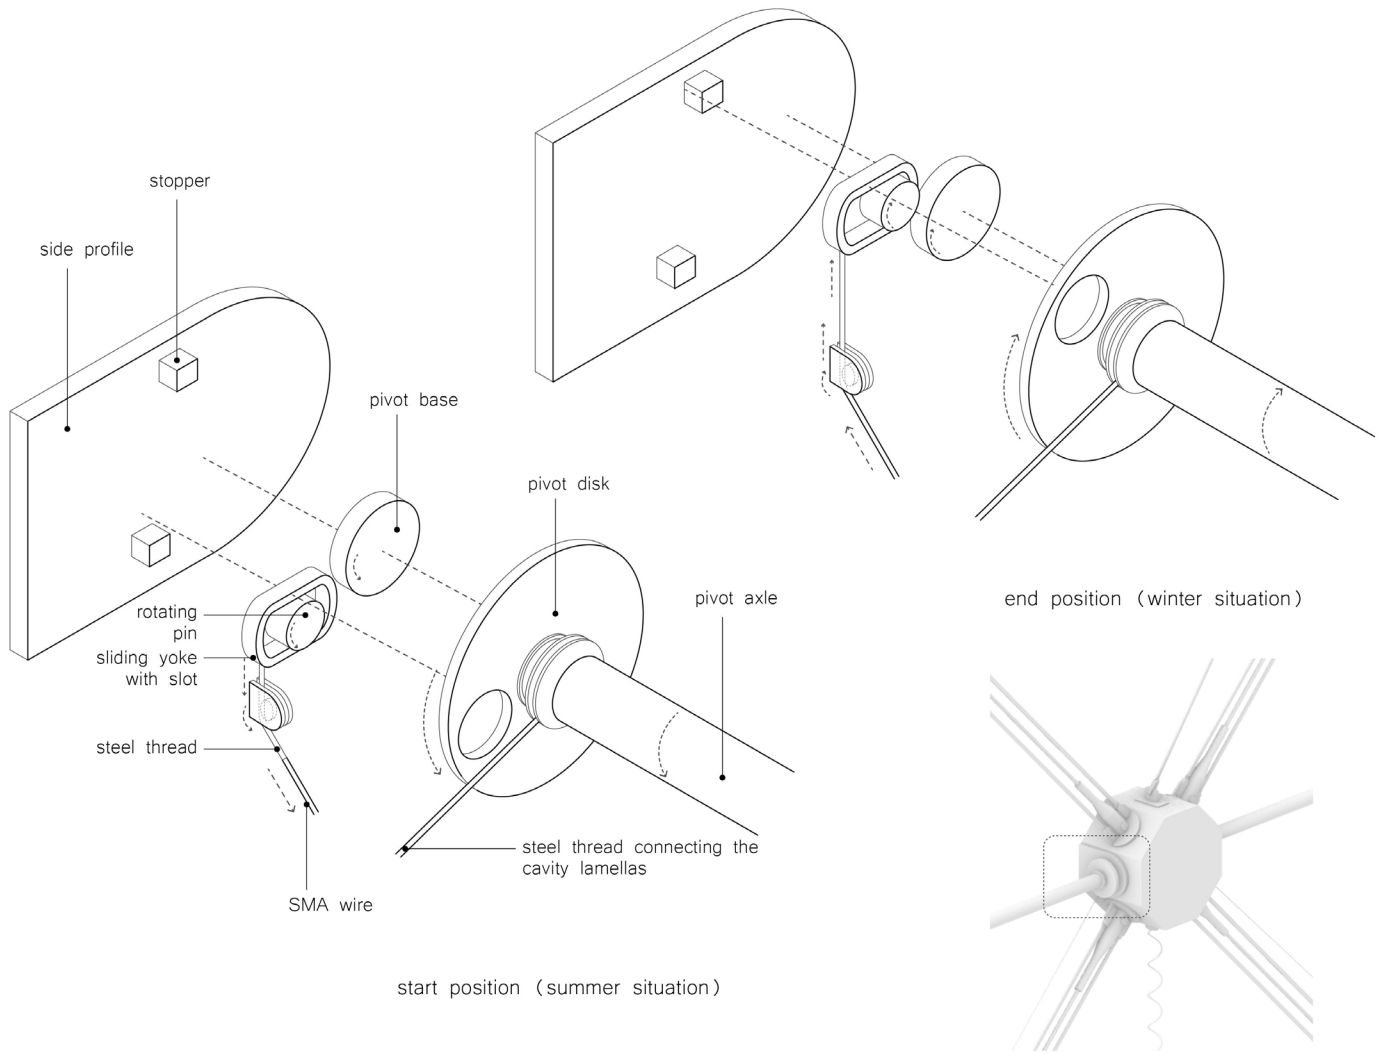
Exploded drawings of the pivot mechanism at the end positions. [own work]
